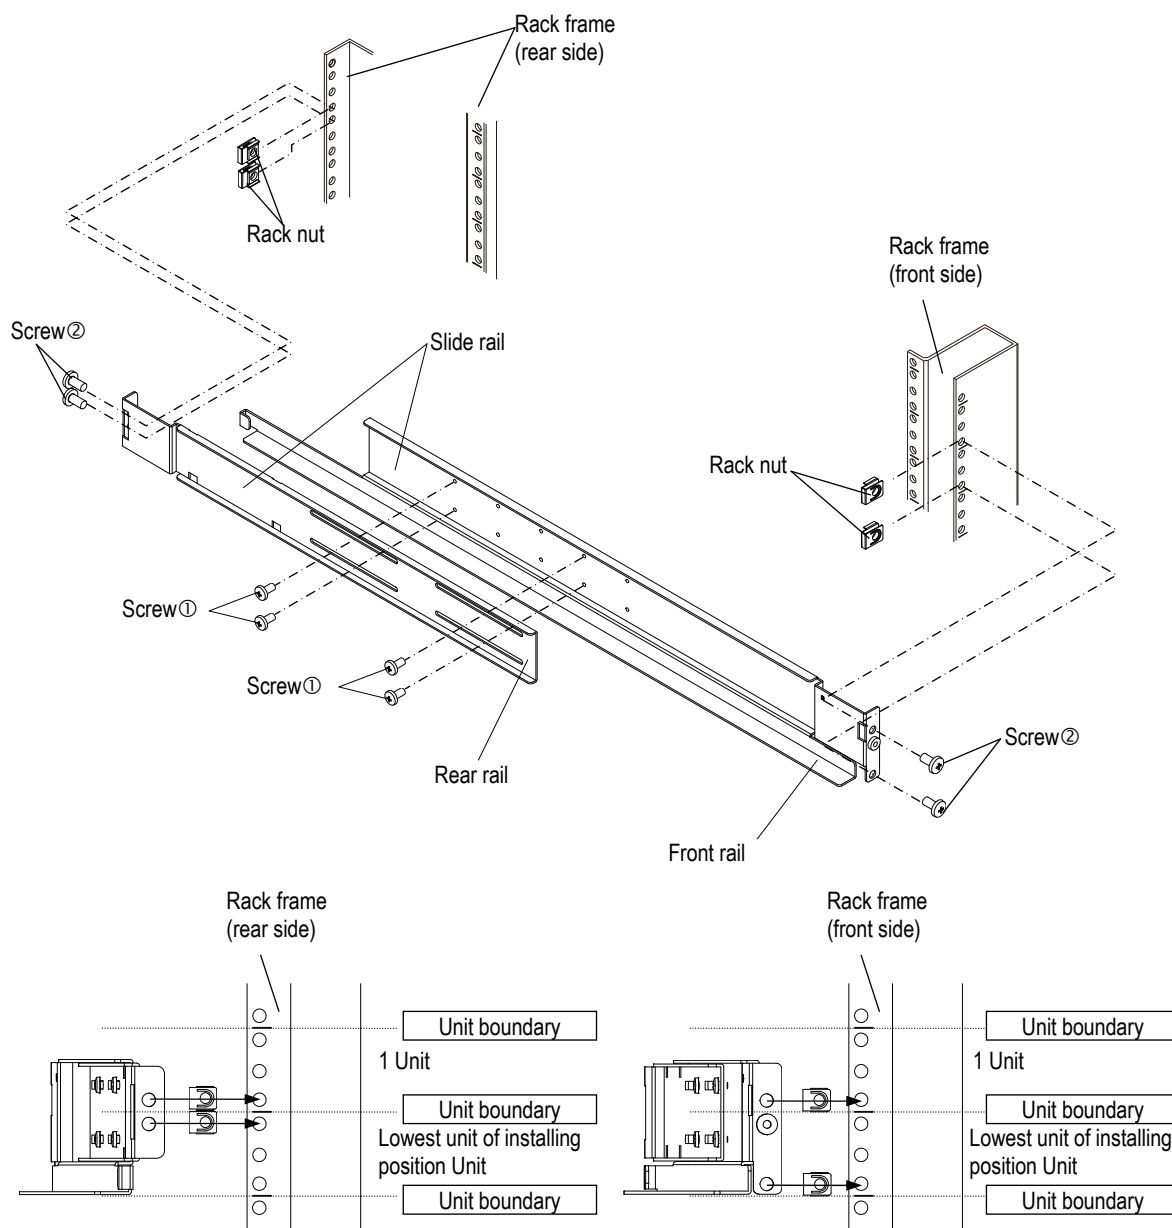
Installing Rack Rails (Circular Hole) for Drive Box (DBF)
